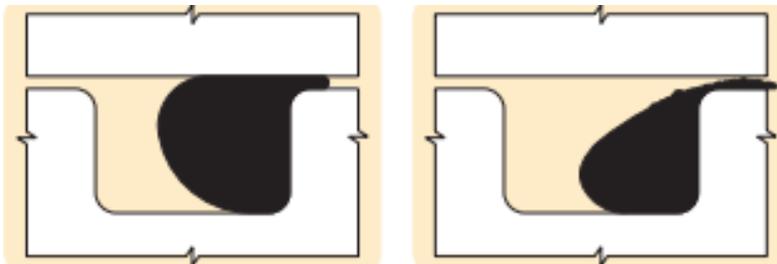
O-Ring extruded and O-ring failure (Parker Hannifin Corporation, 2018).
